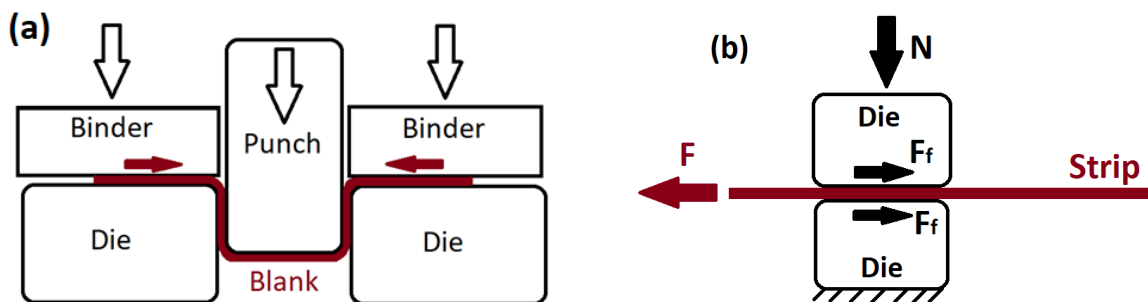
Schematic of (a) deep drawing process (b) strip drawing test
